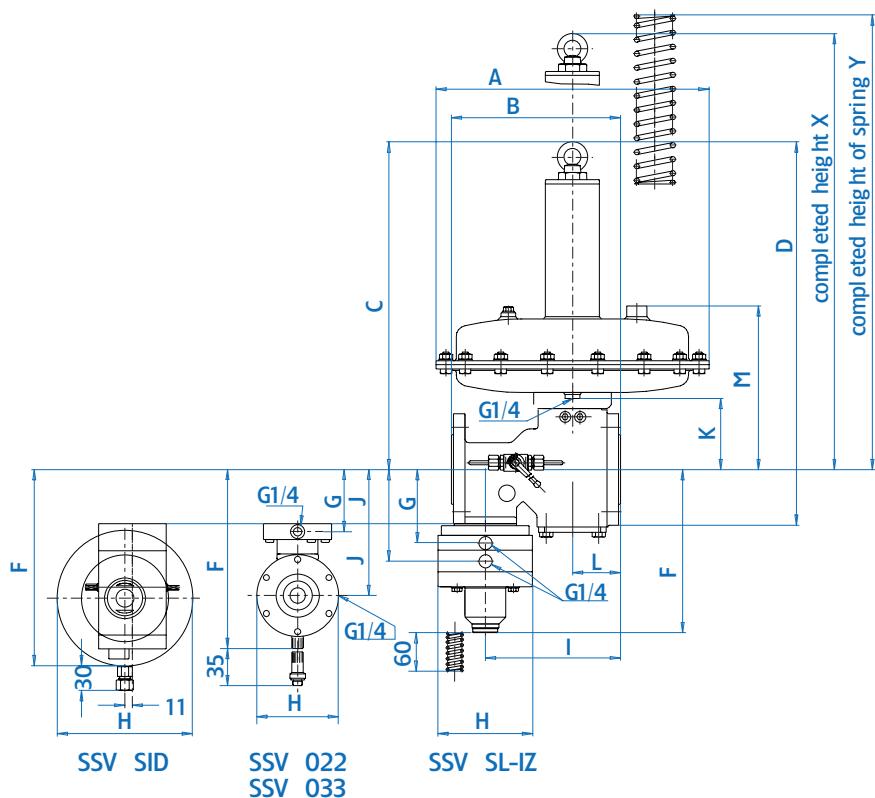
RR16 Regulator with Safety Shutoff Valve - Dimensions
